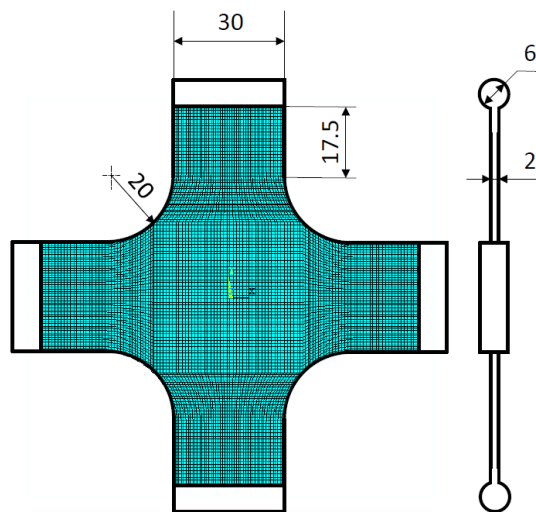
Geometry of the cruciform specimen. Dimensions in mm.
